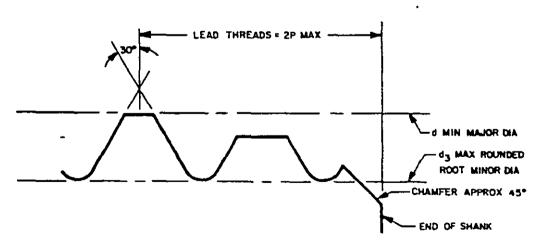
INCOMPLETE FORMED EXTERNAL THREADS, LEAD-IN THREADS
